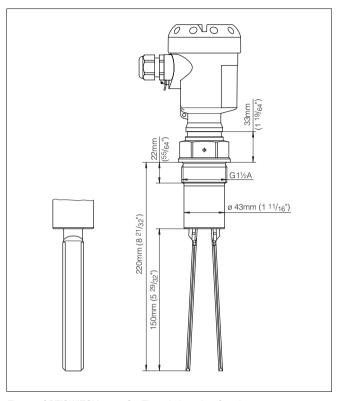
OPTISWITCH 3100 C - Threaded version G11/2A
